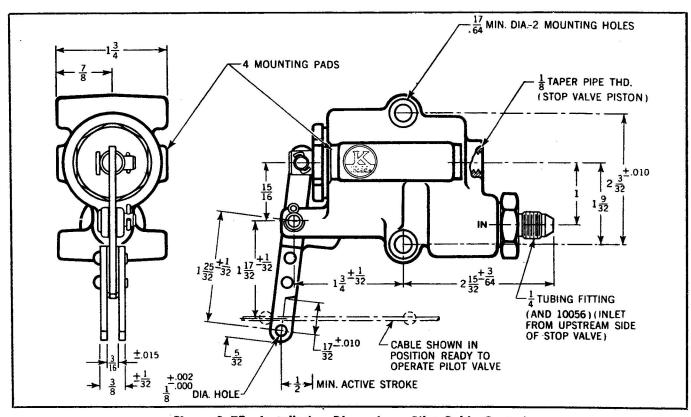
E-Installation Dimensions, Pilot Cable Control
